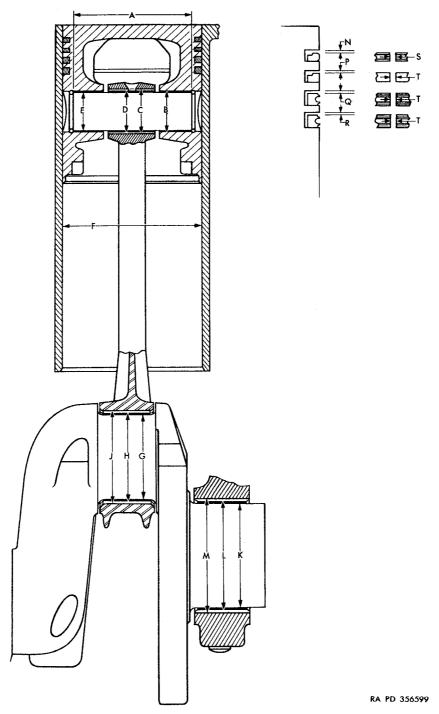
Crankshaft, connecting rod and piston tolerances.
